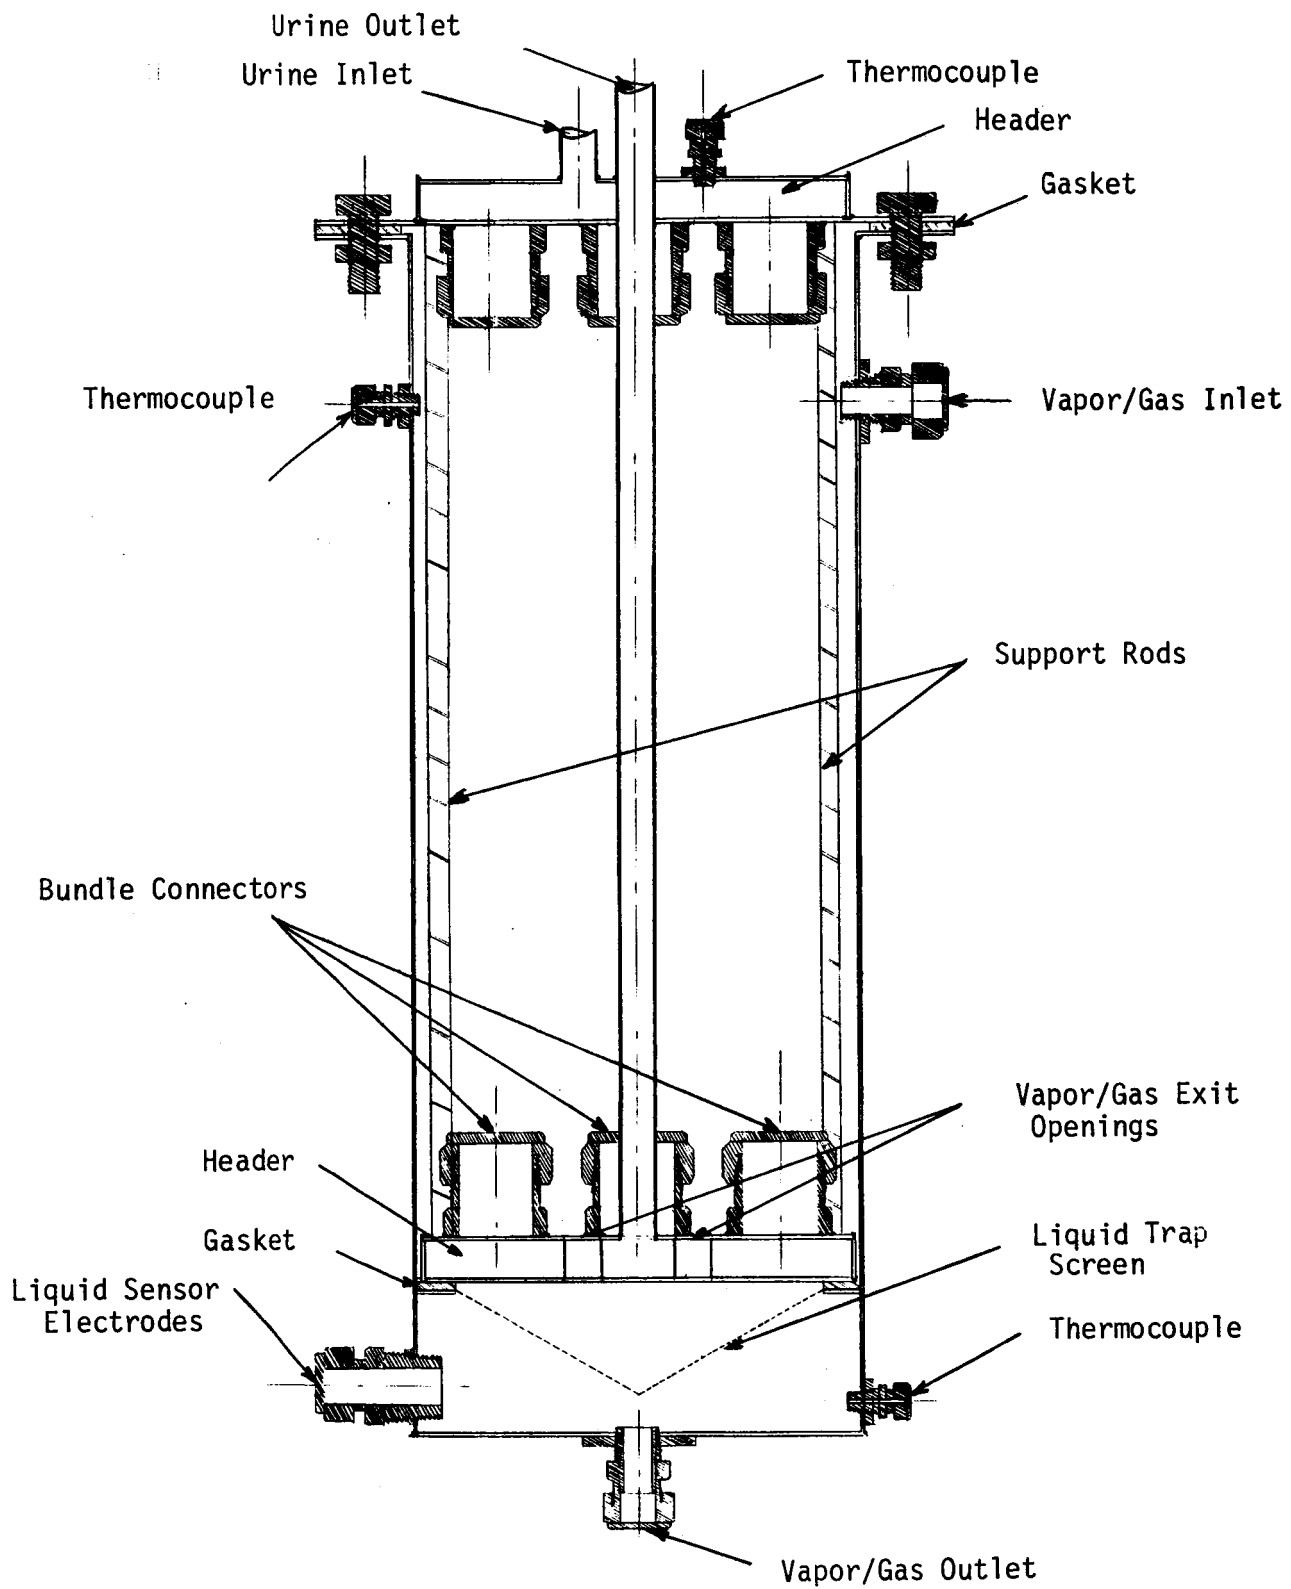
CUTAWAY VIEW OF THE EVAPORATOR
